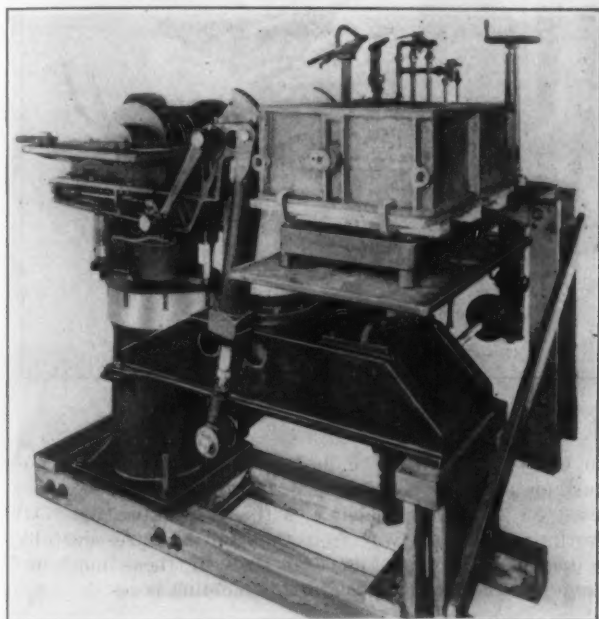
The Machine with the Flask Rolled Over and the Pattern Drawn and Rolled Back.
